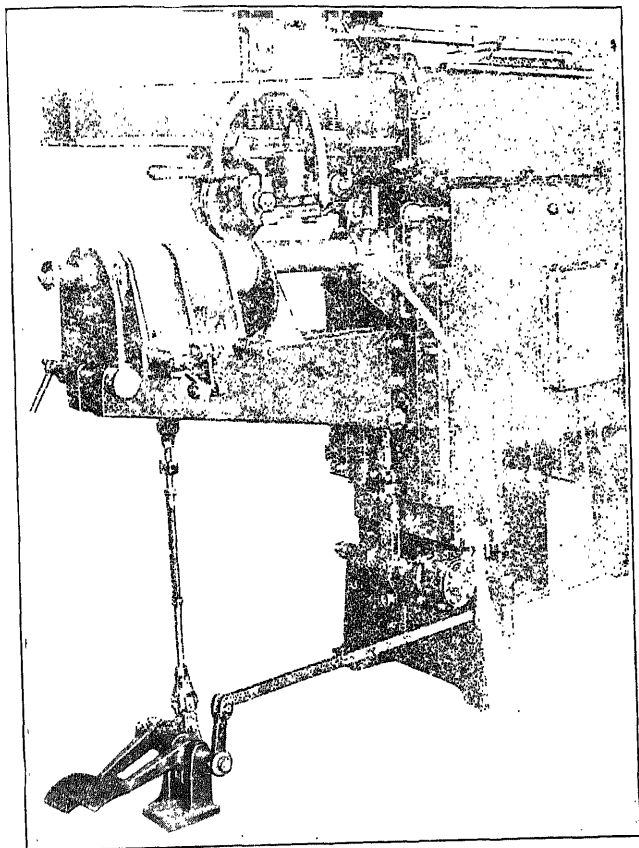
Holding Jig for Automobile Muffler Tubes.
